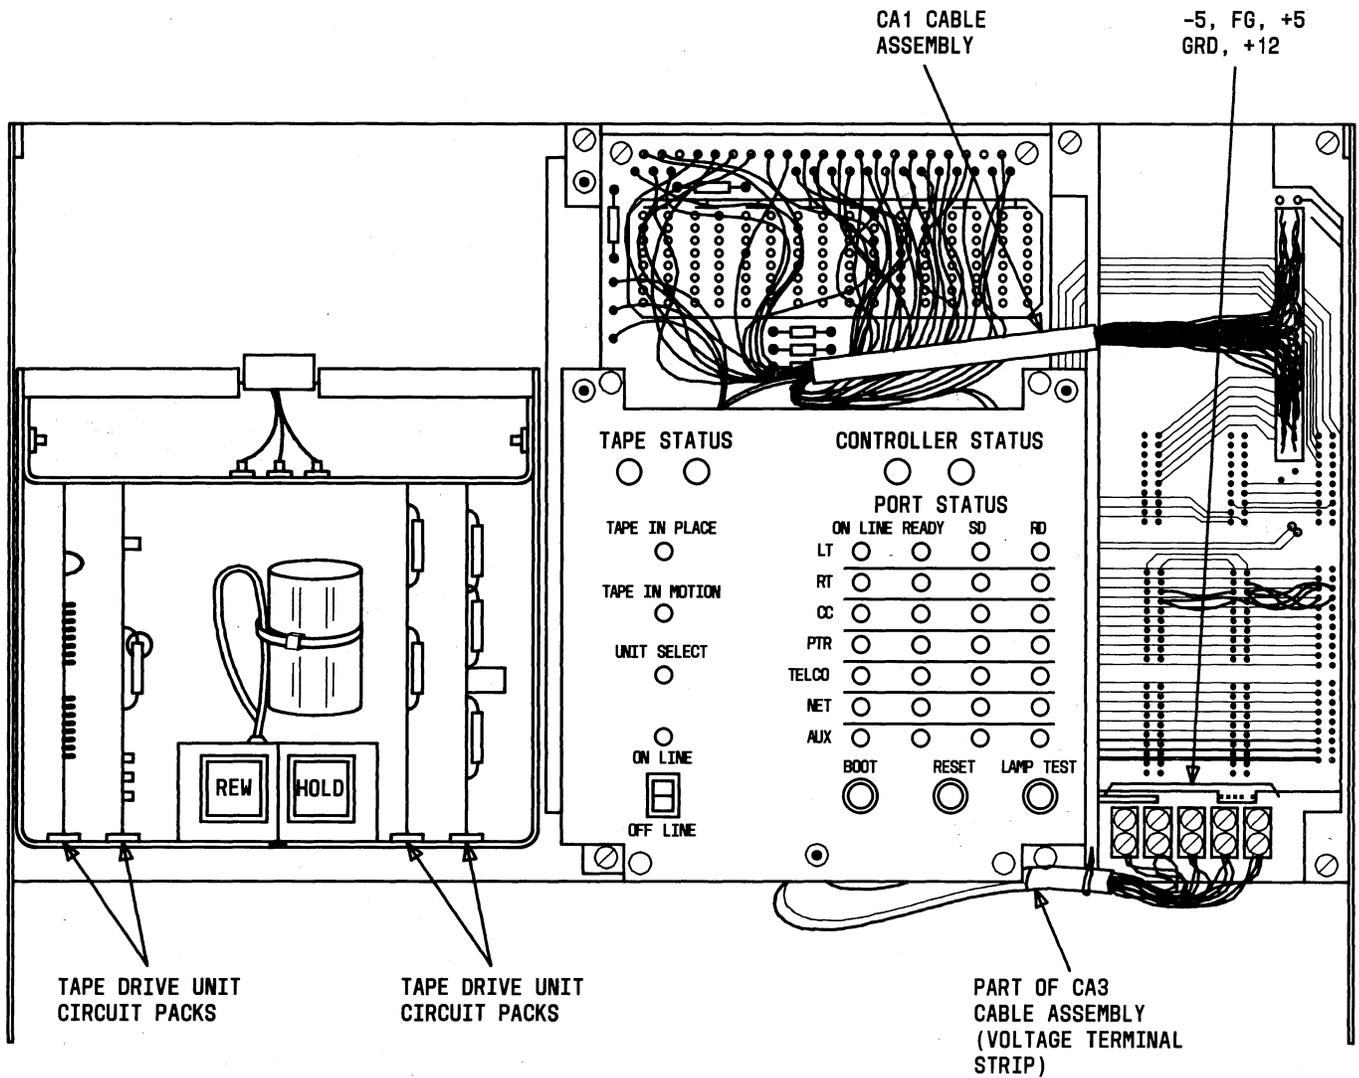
NC Front View (Cover Removed) Showing CA1 and CA3 (Voltage Terminal Strip) Cable Assembly
